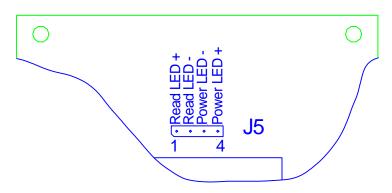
5553 Reader USB Comfort Multi ISO - Jumper 5 Pin Out - Top View
